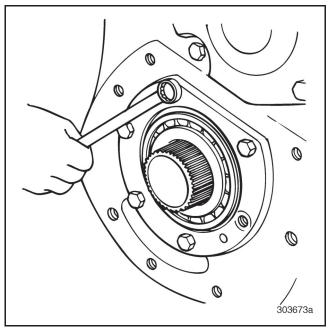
Removing Main-Drive Shaft Bearing Retainer Capscrews
